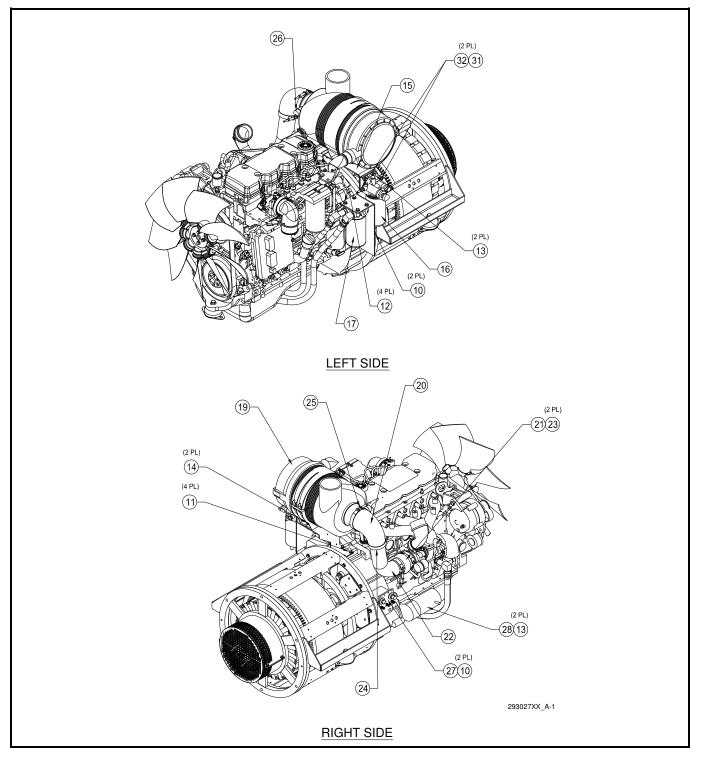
Genset Assembly, 60/90kVA (Sheet 2).
